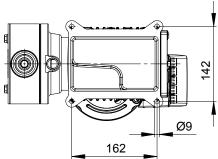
Dimensioned drawing MEMDOS LP 110, 160 - 1010
